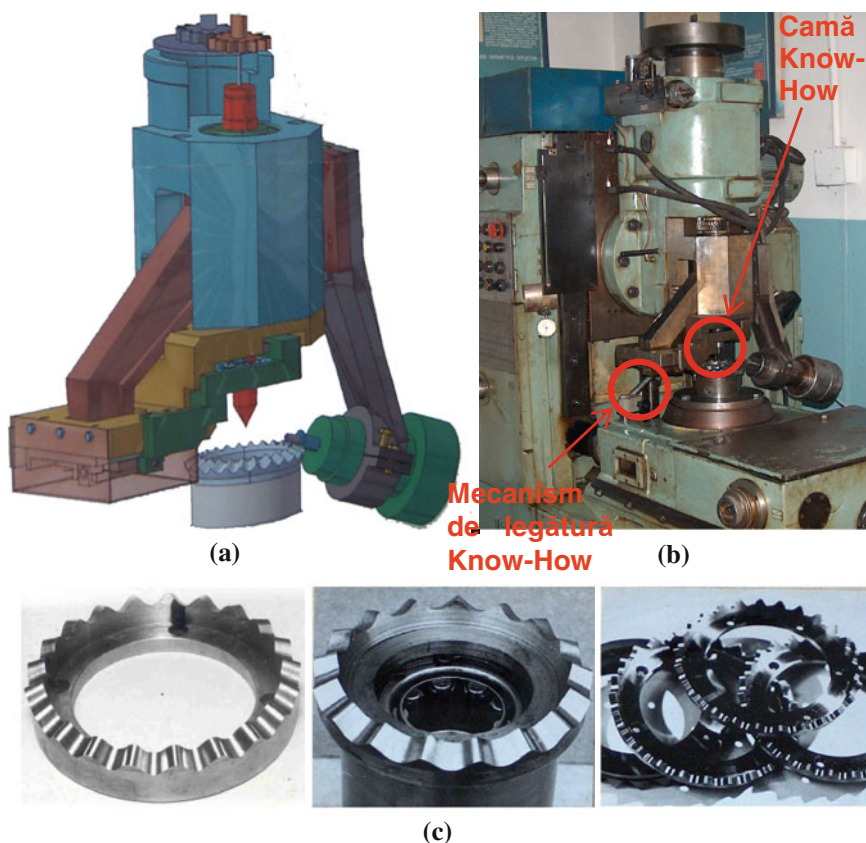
Generation device for gears with non-standard profile (a), machine-tool with fabricated device (b) and samples of fabricated gears (c)
